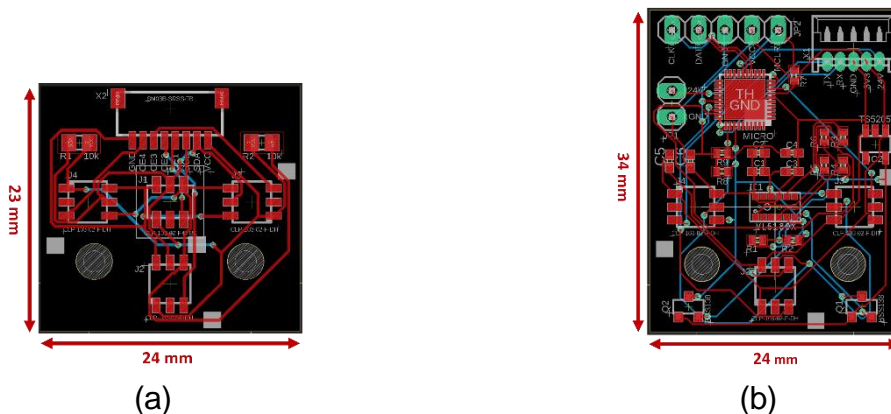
Interface board v1 (a) and v2 (b): Eagle view of the PCBs.
